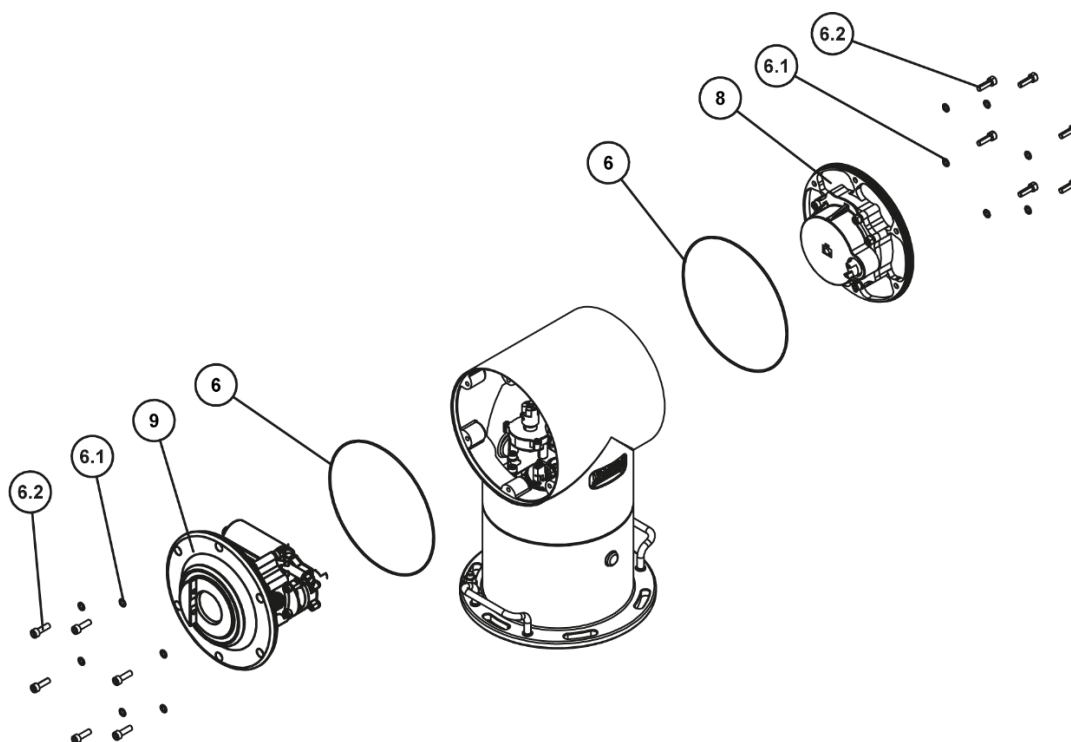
Exploded view of Pan/Tilt unit with Sealing for flange
